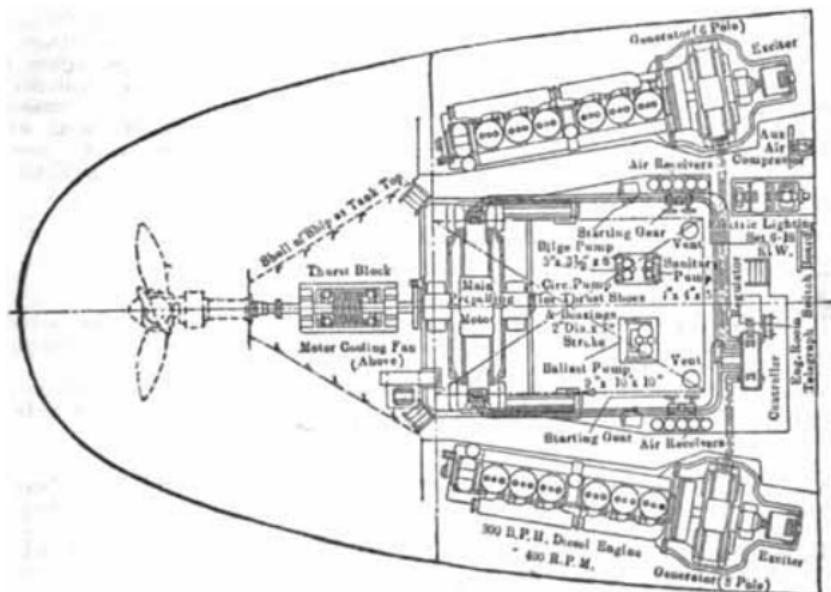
Plan of arrangement of the "Tynemount's" machinery.
